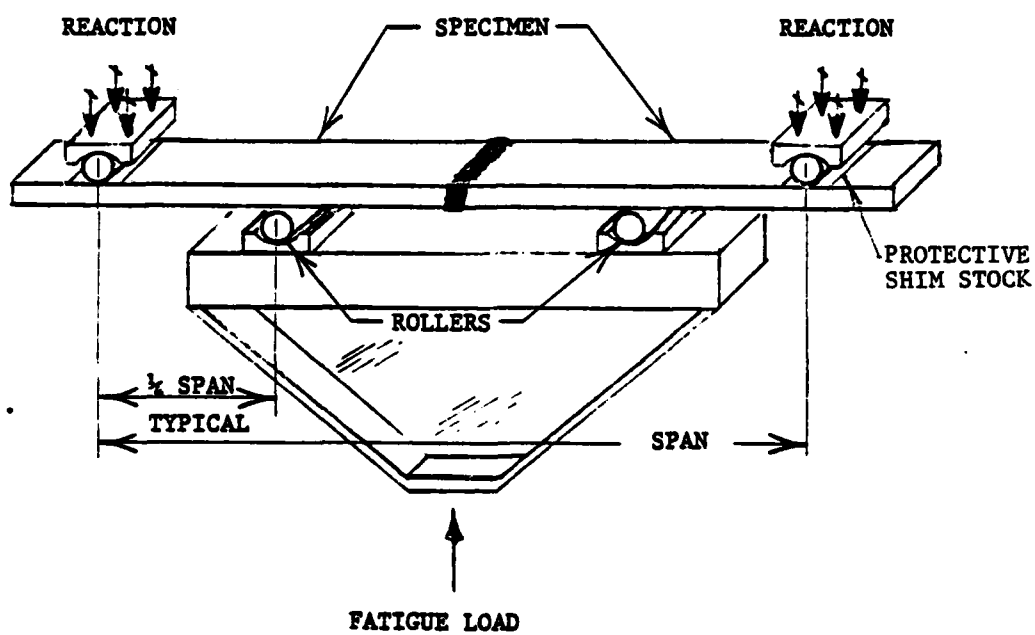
Fixturing Setup for Welded Plate Bending Fatigue Tests.
